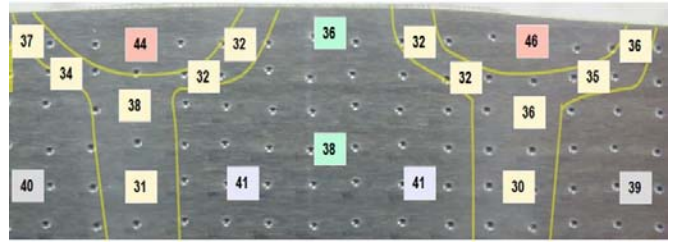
A diagram showing the Vickers hardness measurements of an induction treated EFB weld cross section
